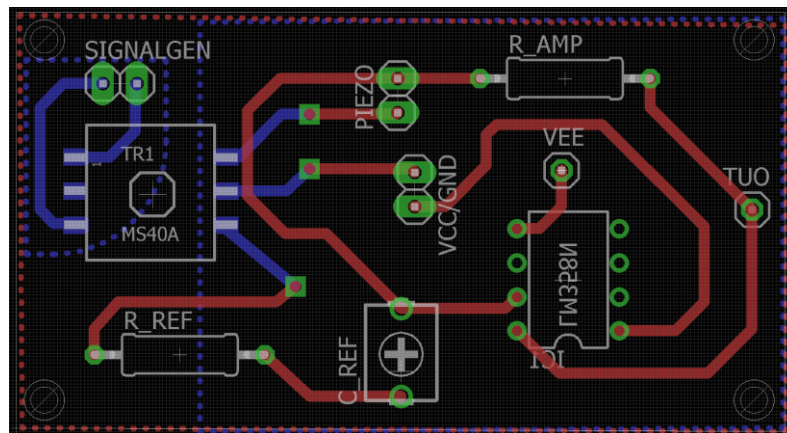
PCB schematic final design using CadSoft EAGLE PCB design 7.5.0 Light
